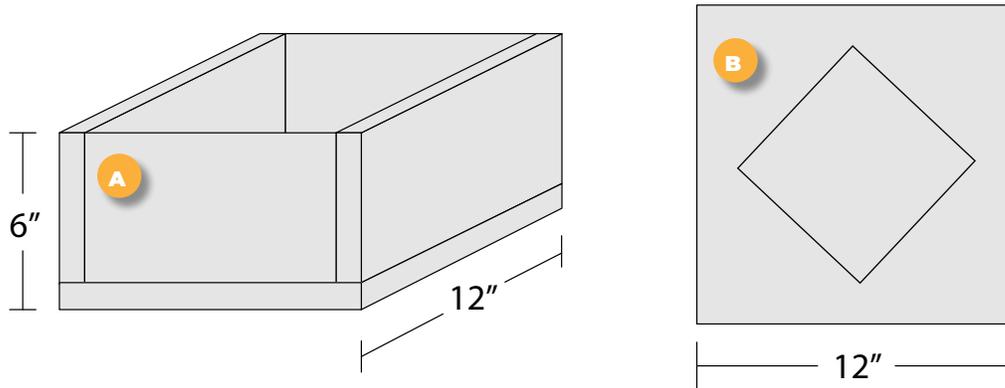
Diagrams of hive box design showing (a) lower box and (b) hole cut in floor of upper box.
